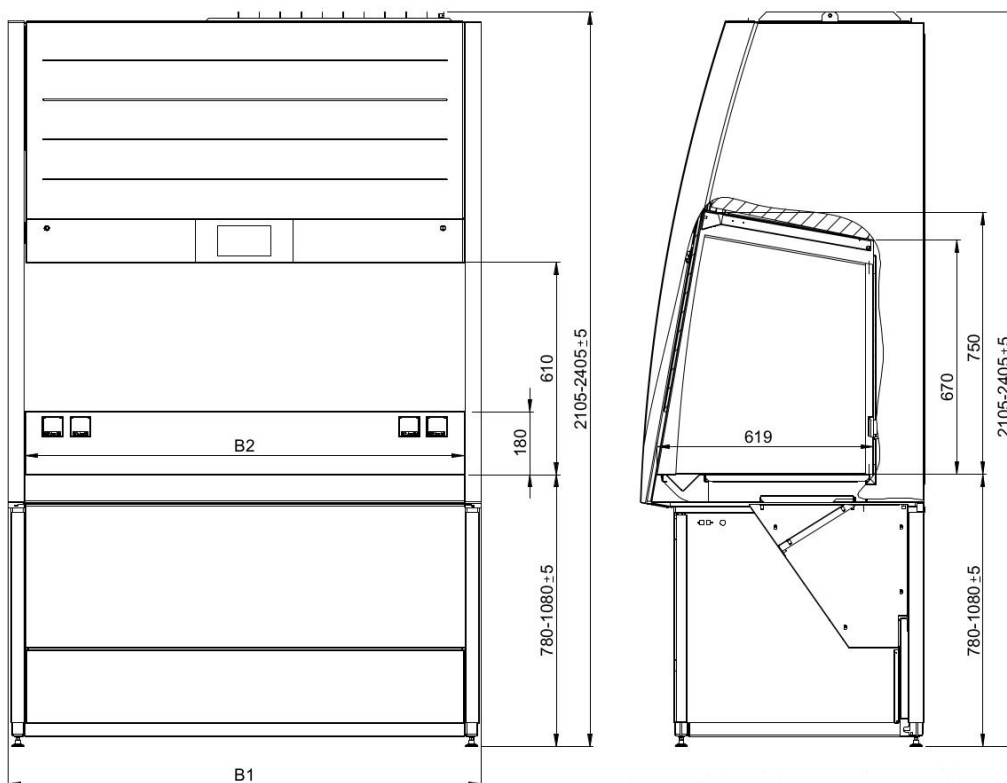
Design and dimensions of the safety cabinet in front and side view with electric base frame, example: claire® pure B/C-3-130 (B1 = width, outer dimensions; B2 = width of working access opening, depending on model size, see table of technical data)
